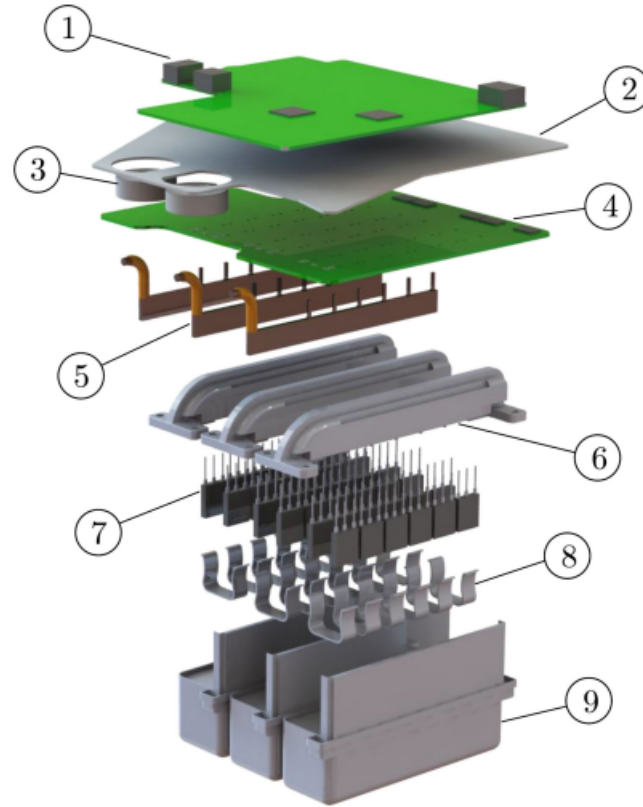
Tesla Model S 2015 power electronics cooling module: 1) Control board. 2) Aluminium shield. 3) Phase current sensor ferrite ring. 4) Gate driver board. 5) Phase busbars. 6) Heat sinks. 7) TO-247 package IGBTs. 8) IGBT clips. 9) DC-link capacitors [155]
